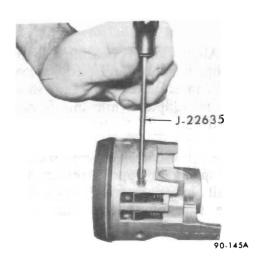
I46 - Removing Lock Shoe Pivot Pin
